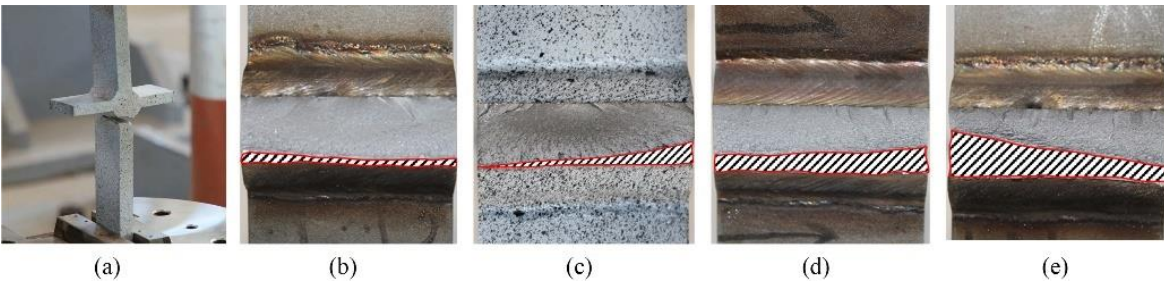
Fatigue failure of the studied specimen (ductile fracture surface is hatched) [41][41]: (a) typical failure mode at the weld toe; (b) fracture surface at  $\Delta\sigma = 80 \text{ MPa}$ ; (c) fracture surface at  $\Delta\sigma = 110.4 \text{ MPa}$ ; (d) fracture surface at  $\Delta\sigma = 181.8 \text{ MPa}$ ; (e) fracture surface at  $\Delta\sigma = 264.7 \text{ MPa}$ .
